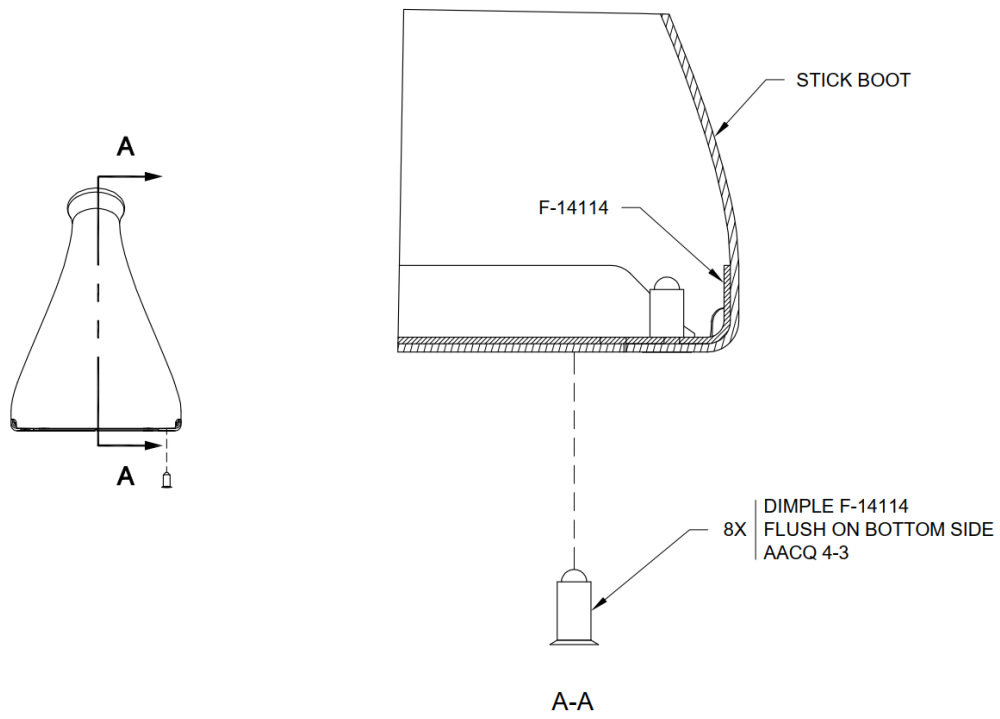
STICK BOOT AND STICK BOOT DOUBLER ASSEMBLY
